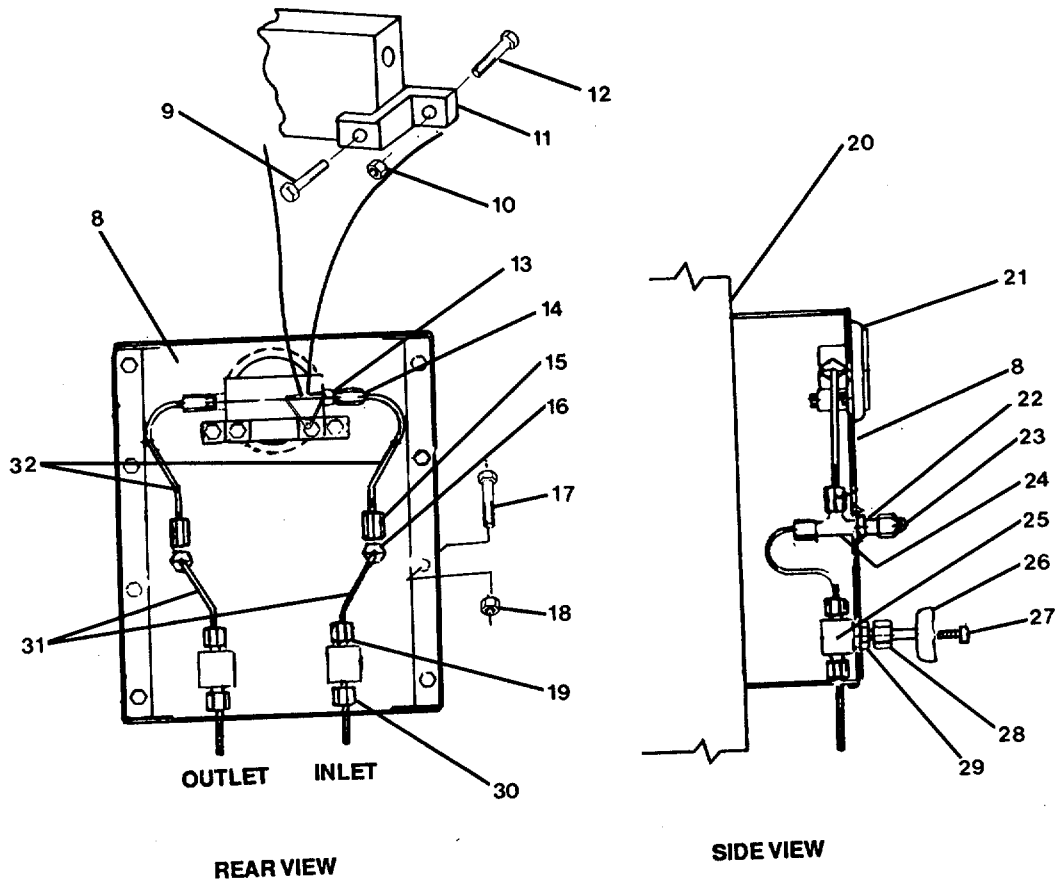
Diesel Fuel Oil Filter/Separator (Sheet 2 of 2).
